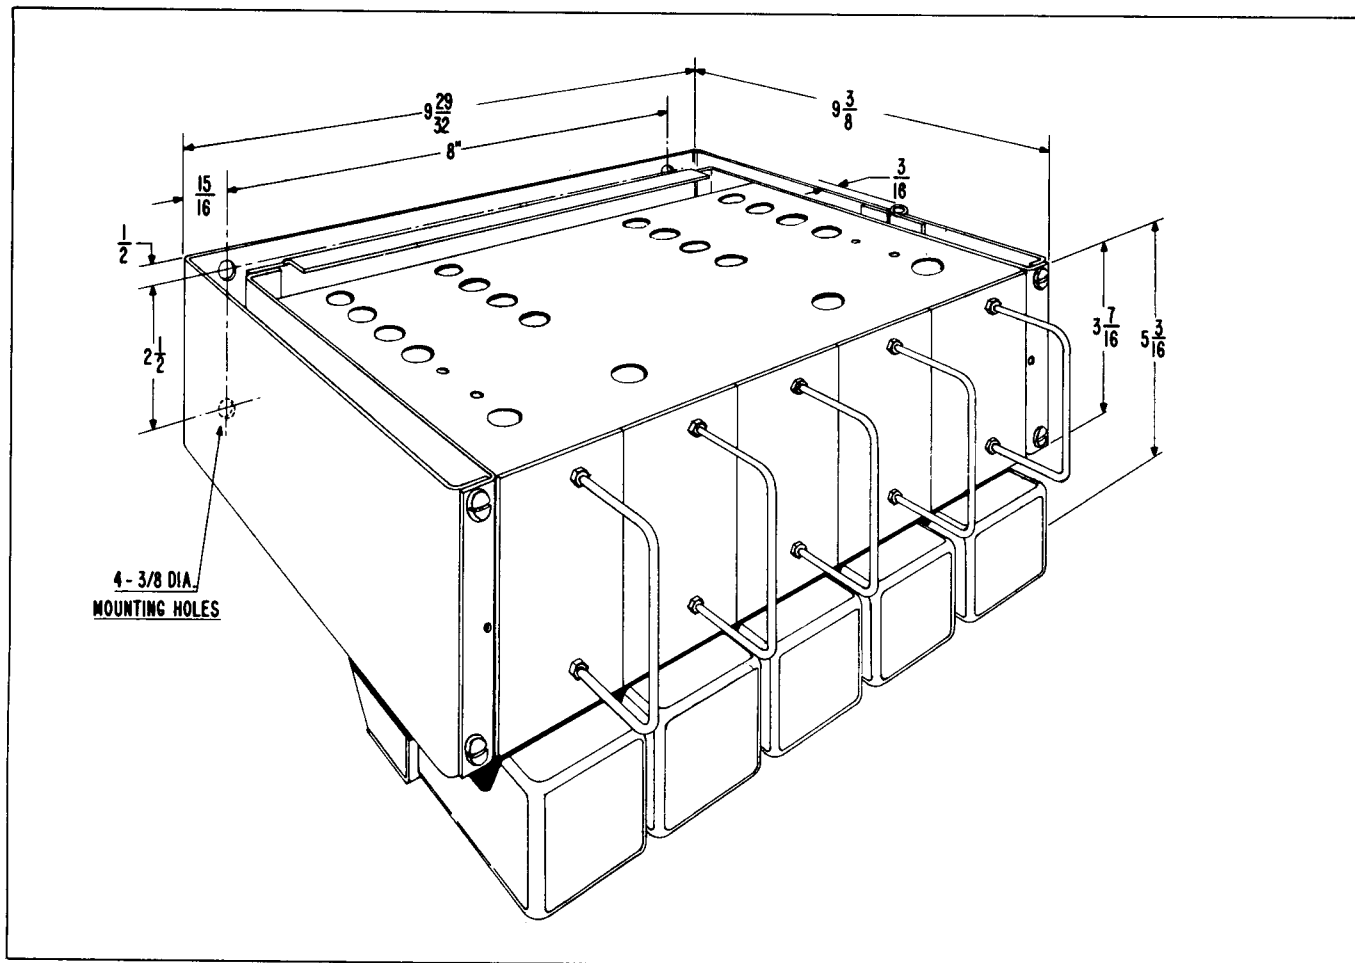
Outline and Drilling Plan of 5 Module Chassis
